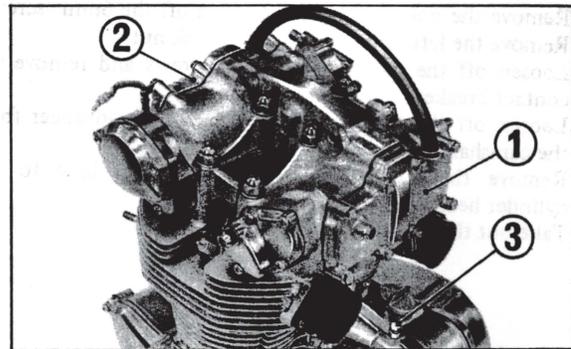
(1) Cylinder head cover A (3) Tensioner bolt
